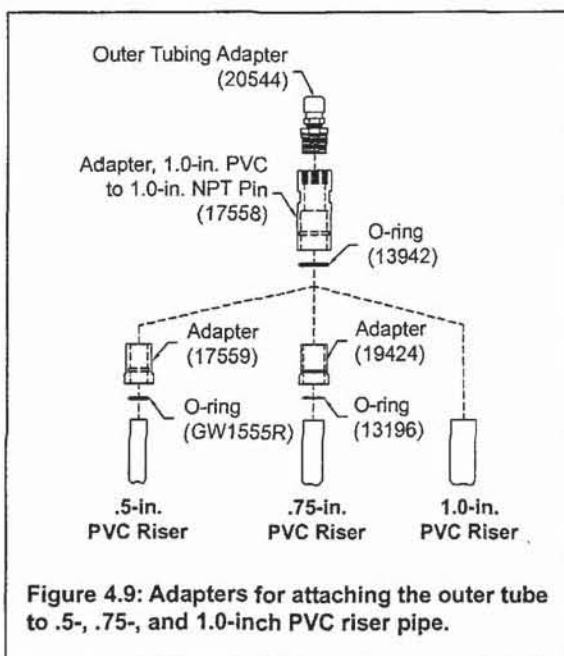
Adapters for attaching the outer tube to .5-, .75-, and 1.0-inch PVC riser pipe.
